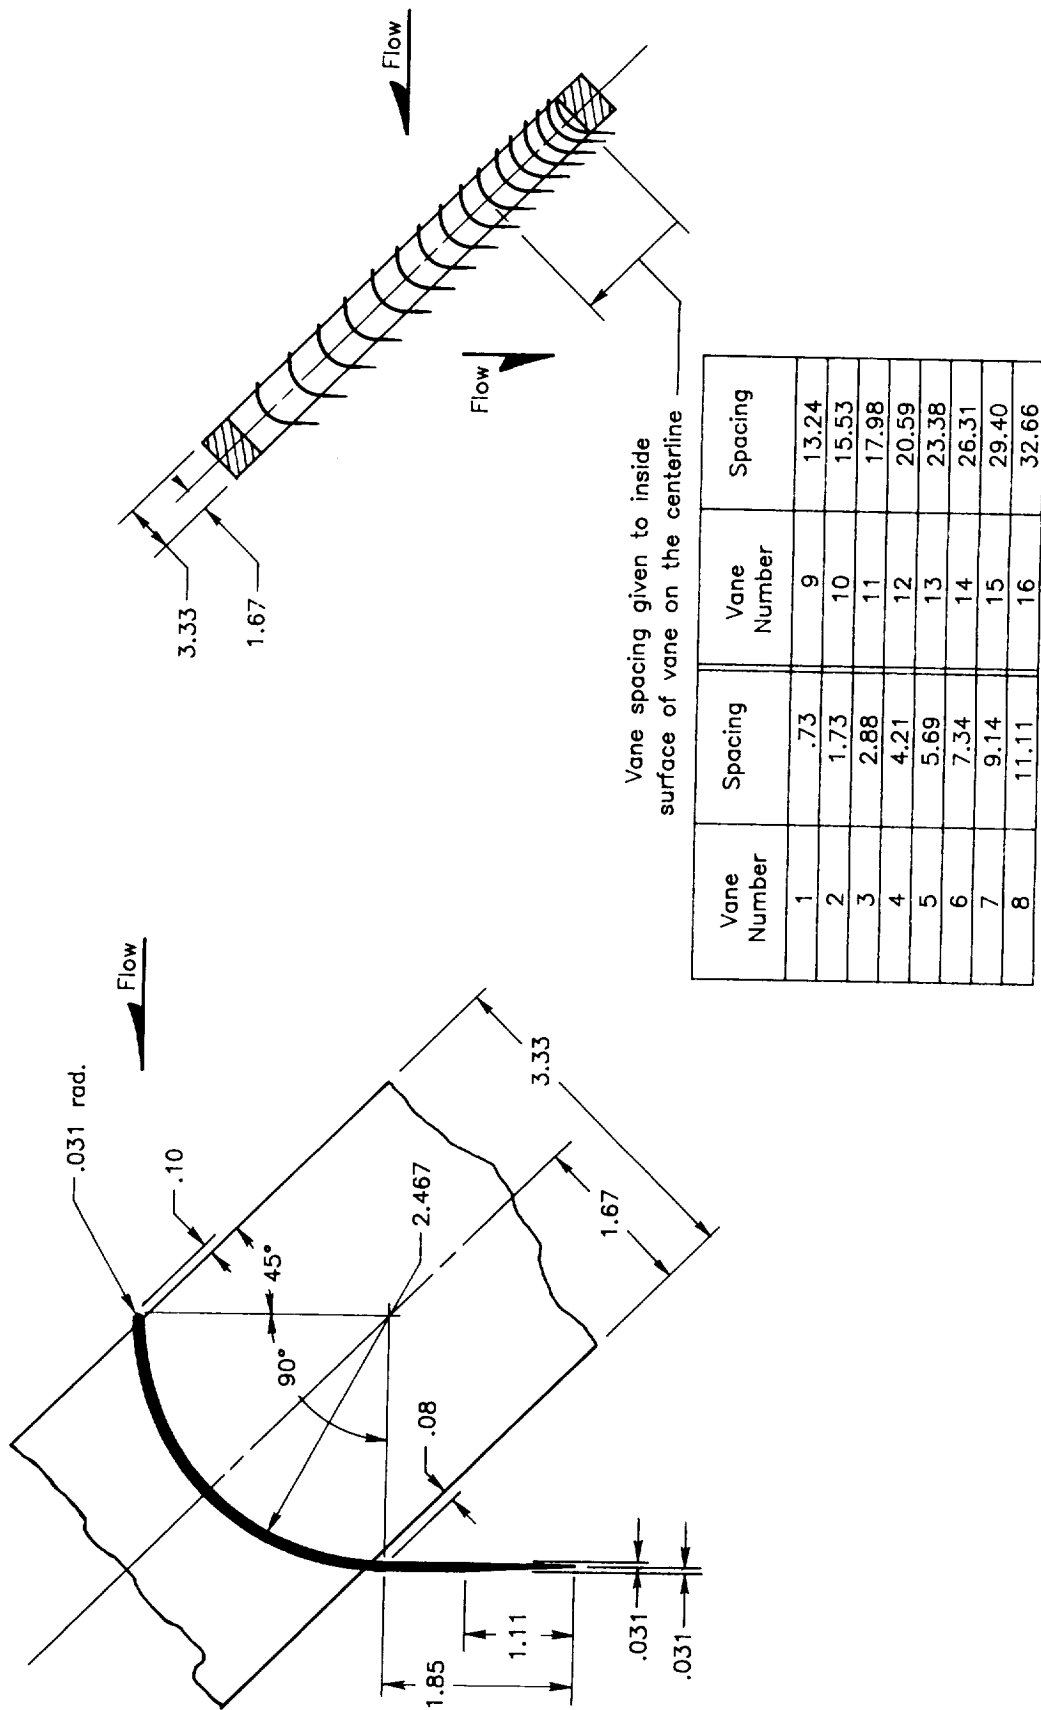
Details of turning-vane assembly. Dimensions are in inches.
